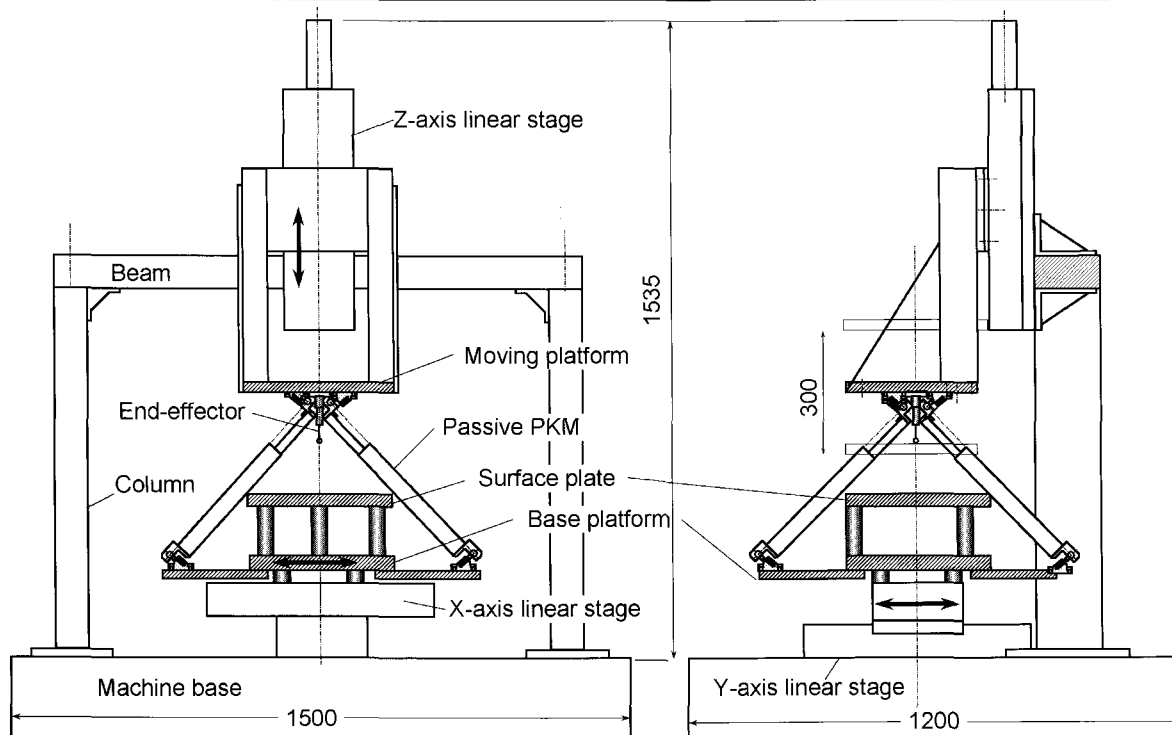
Experimental ultraprecise machine consisting of a conventional orthogonal mechanism and a hexapod passive PKM for measuring 6-DOF motion errors between the tool spindle and surface plate
